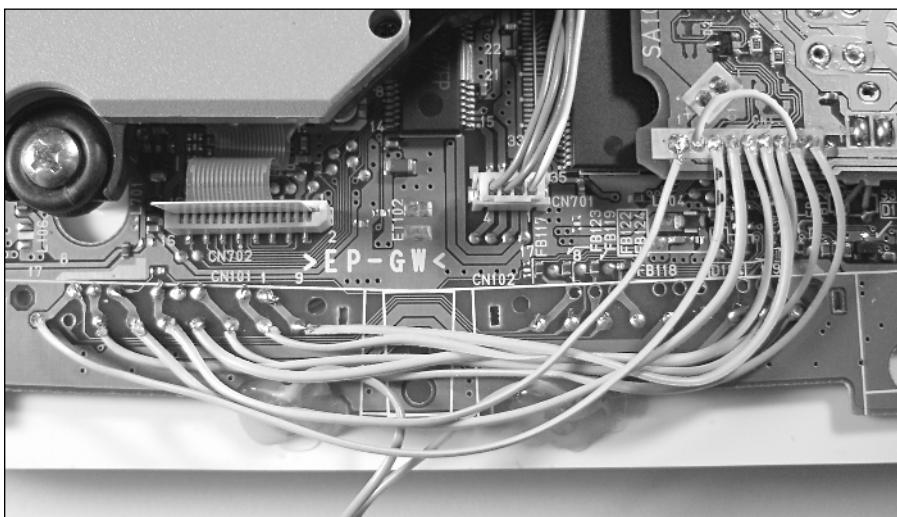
How to situate the wires going from the PSOne board to the controller board.
